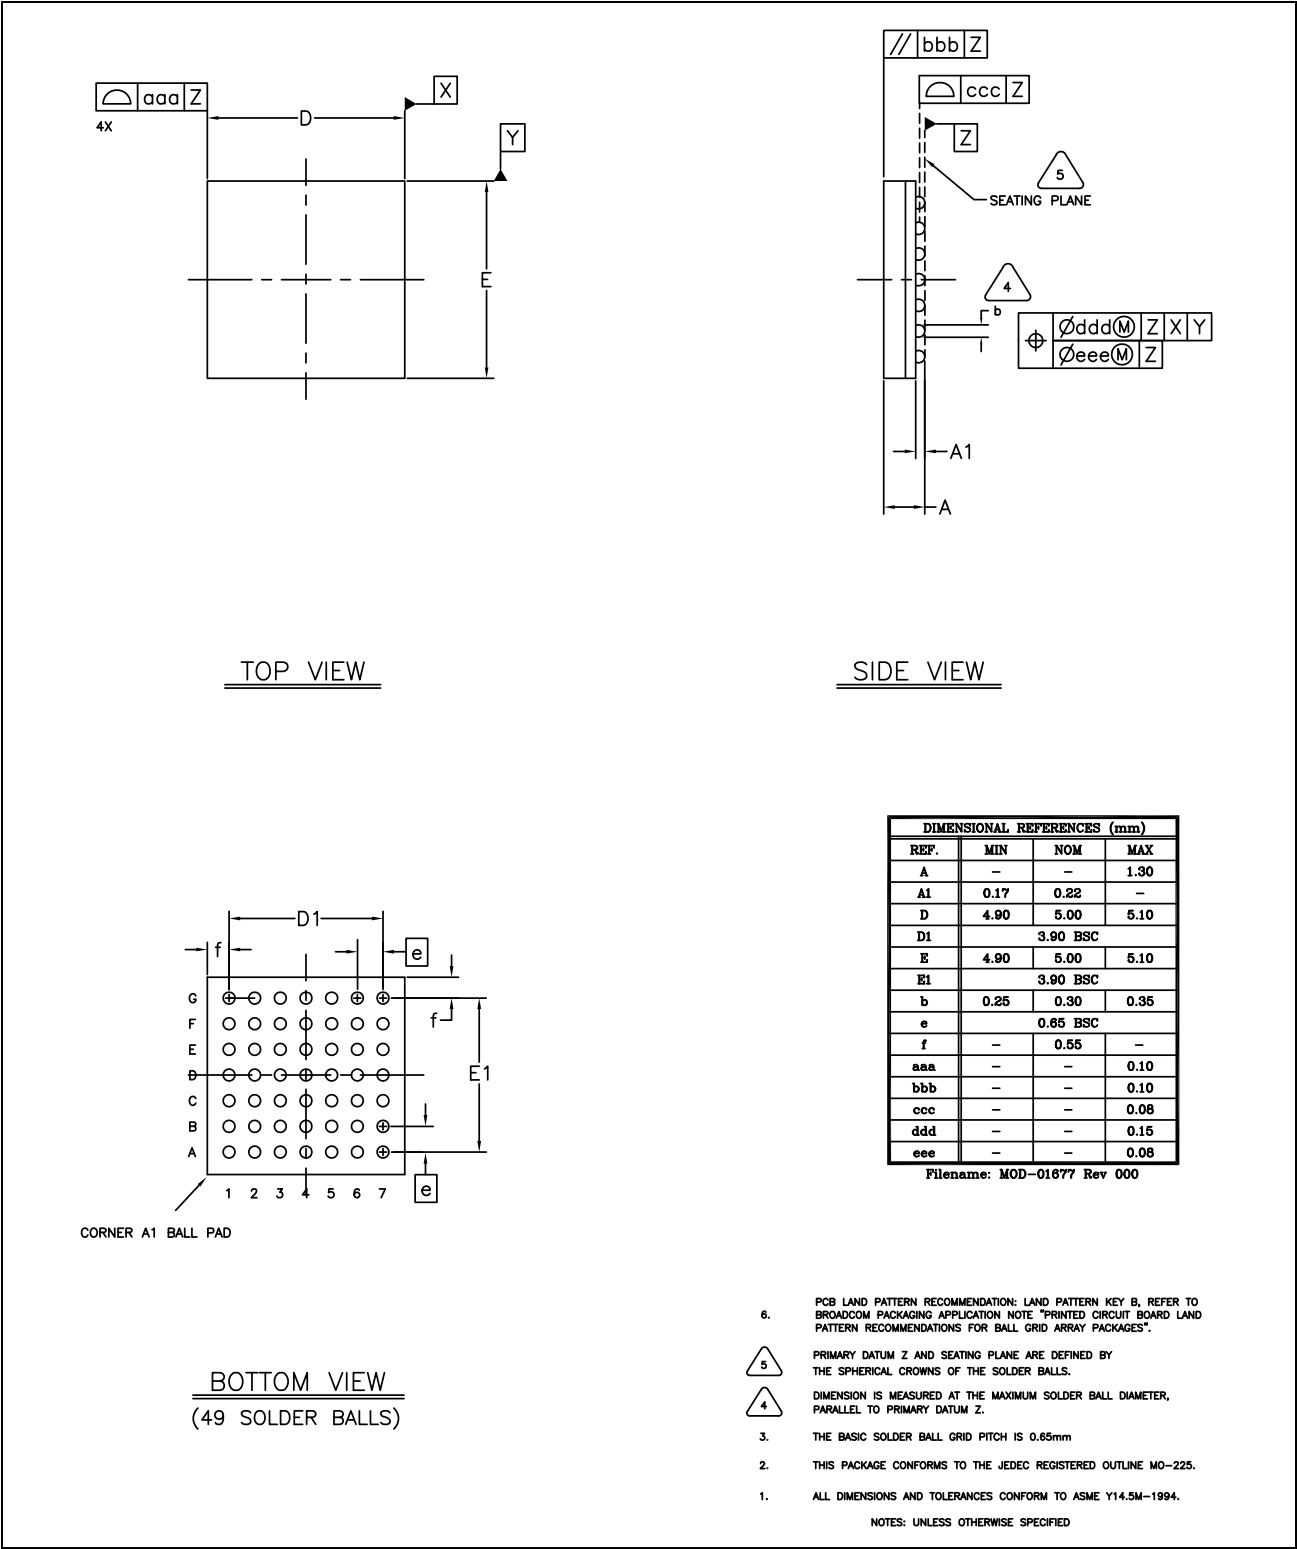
Outline Dimensions of the 49-Pin FBGA Package
